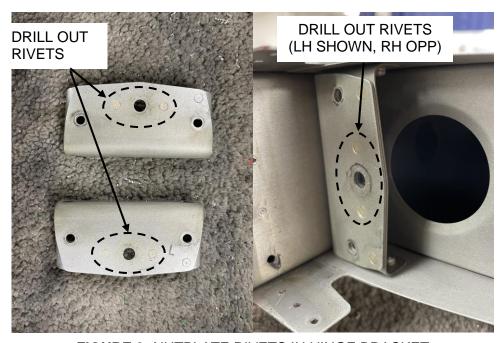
NUTPLATE RIVETS IN HINGE BRACKET ASSEMBLIES
